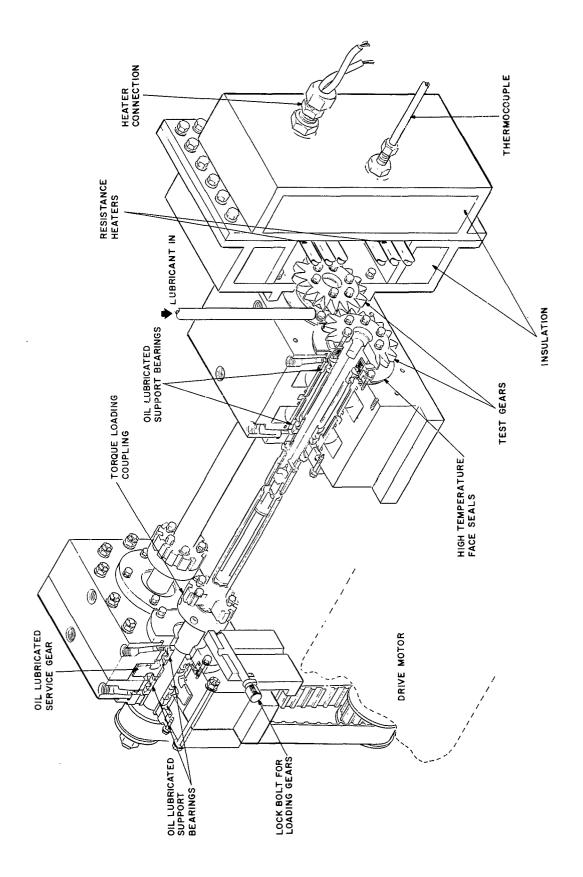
Isometric Cutaway View of Stratos High-Temperature Gear Test Rig
